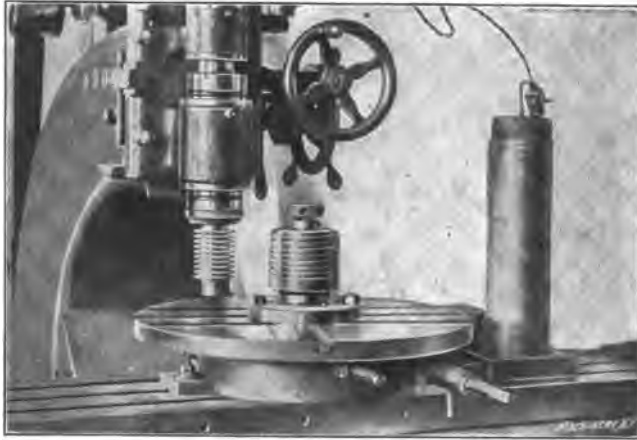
Cutting out Piston Rings in the Vertical Milling Machine
